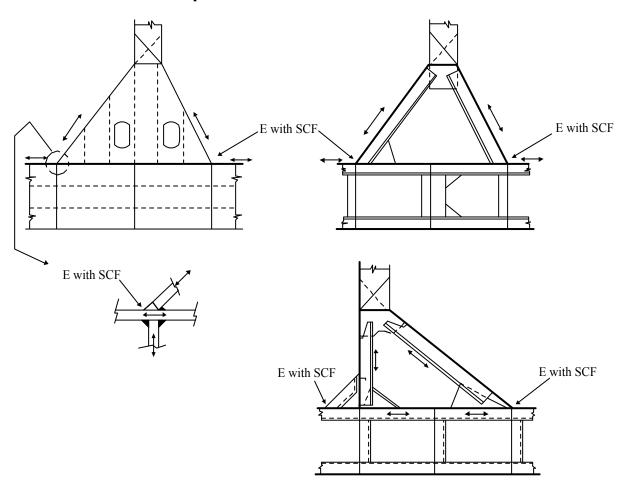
Connection Between Corrugated Transverse Bulkhead and Deck
